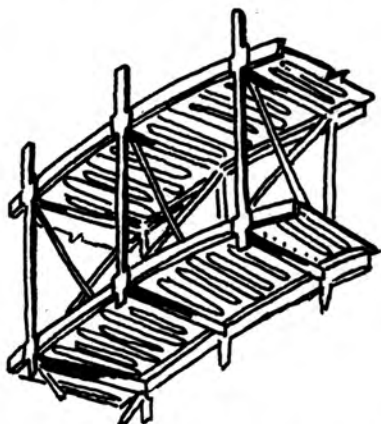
Slosh baffle structural configuration (LO₂ Tank).
